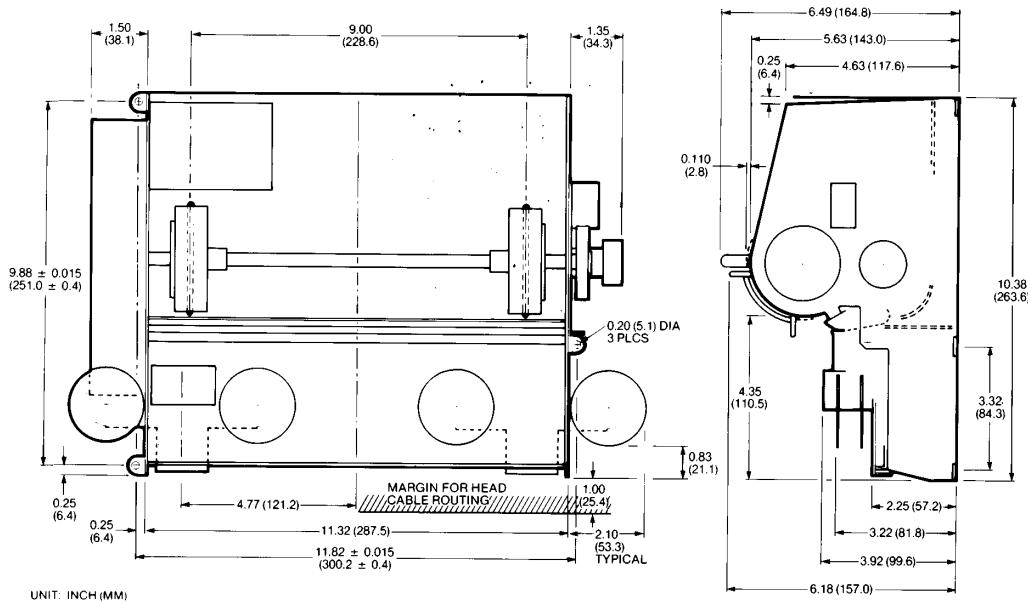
Physical Dimensions of C. ITOH Model 820 Printer
